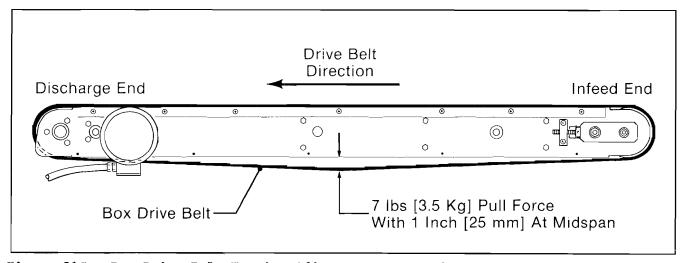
C - Box Drive Belt Tension Adjustment - Top View
